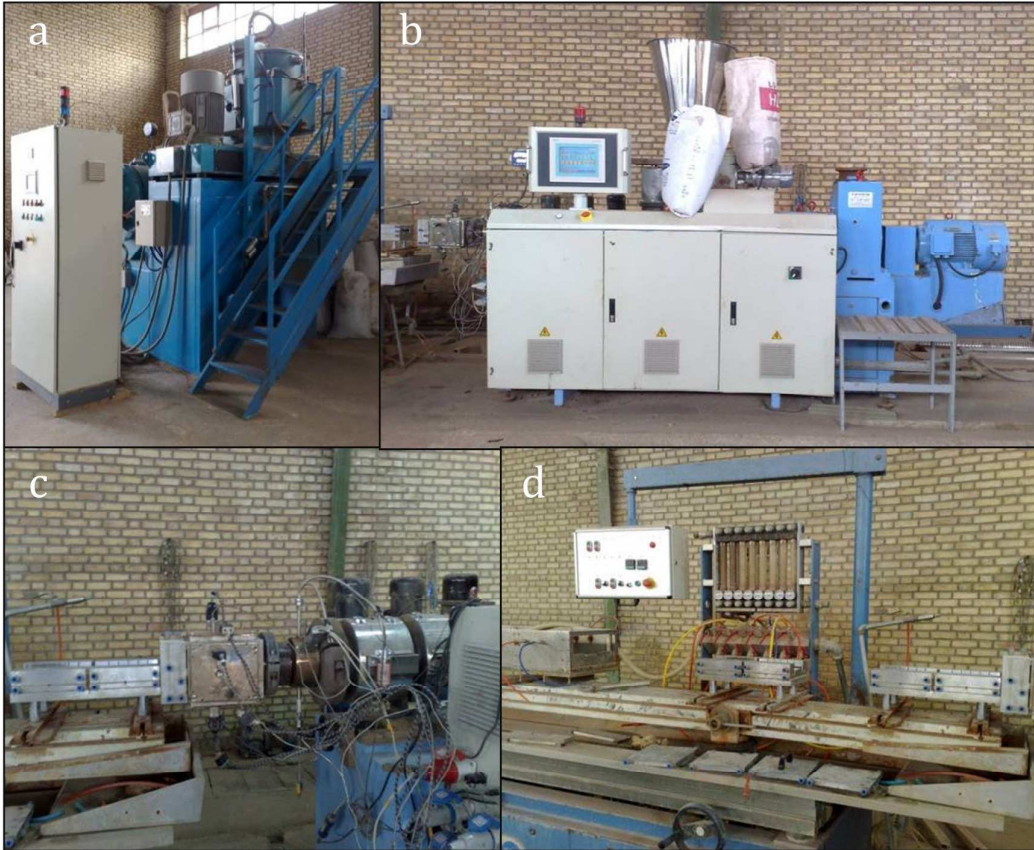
These pictures represent different parts of industrial extruder used for this study: a) Pre-mixer b) Feeder and Control Monitor of extruder; c) End part of extruder barrel and Die; d) Die and opened calibrator (Water pool).
